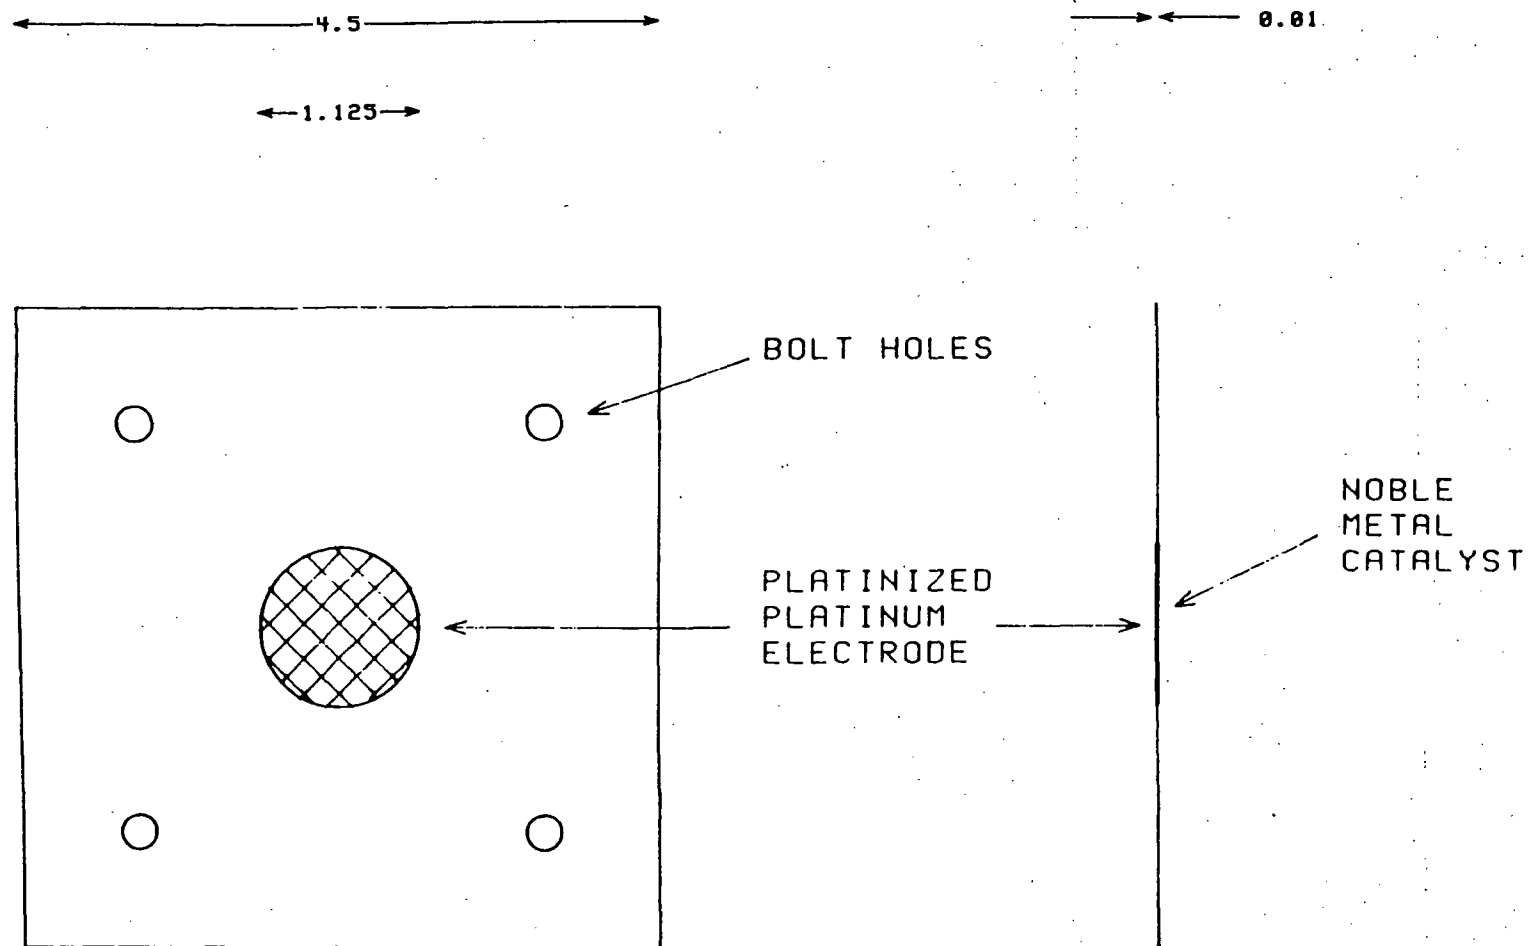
Diagram of Nafion 120 membrane electrode assembly. Dimensions are given in inches, and drawing is to 75% of scale.
